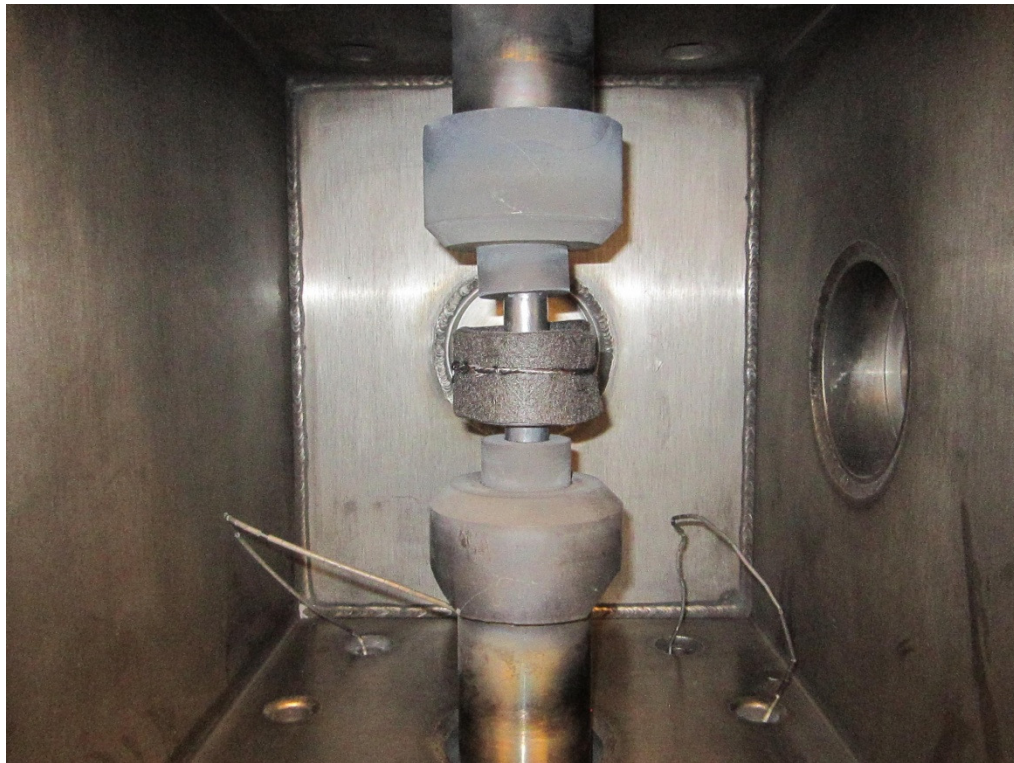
Sample powder compacted in graphite die, punches and spacers assembly.
